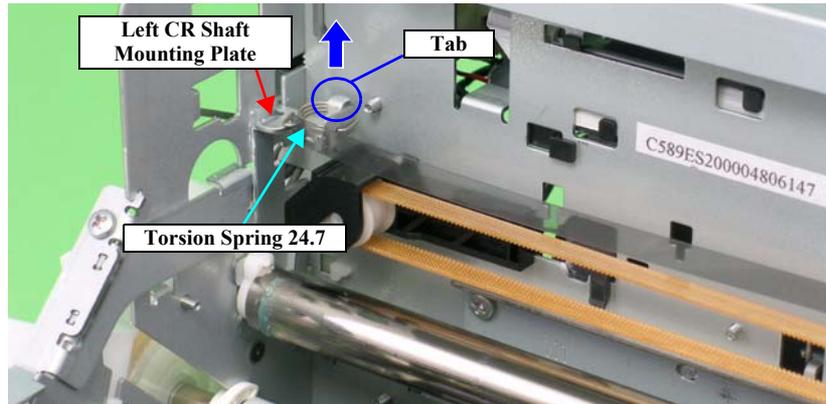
Removing the Torsion Spring 24.7 (1)
